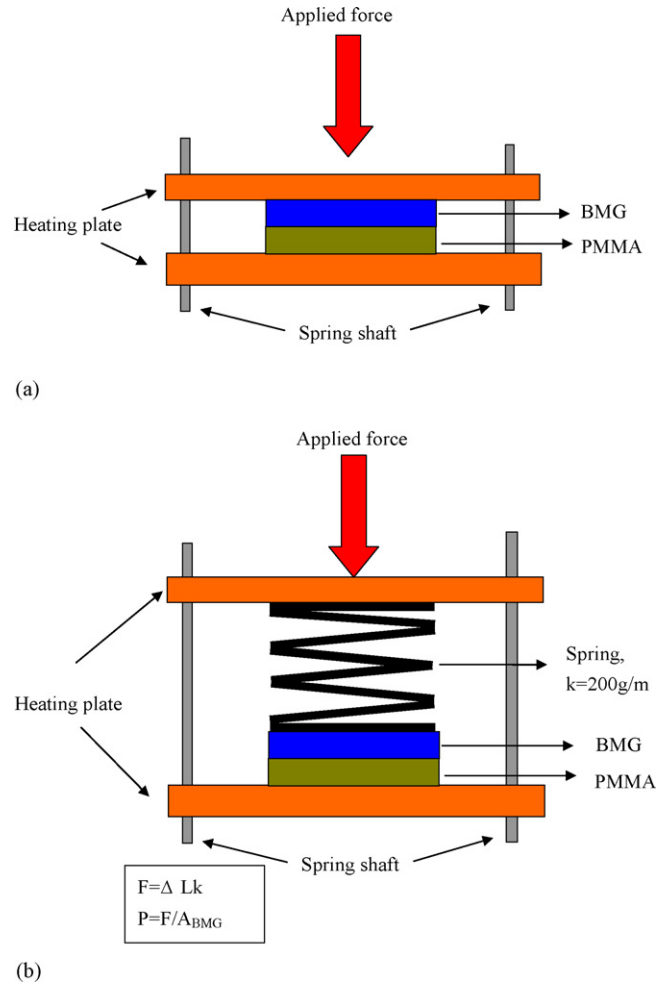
Hot embossing set-up: (a) oil hydraulic system; (b) spring plate system.
